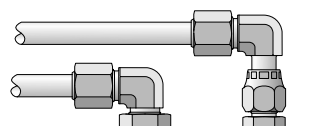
Swivel end fitting with straight connector provides clearance above regular elbow
